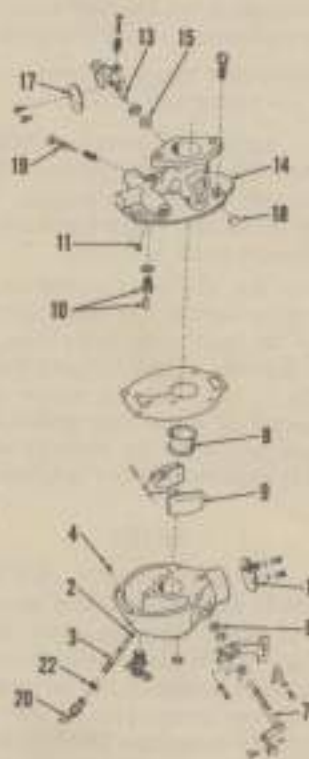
Exploded view of Marvel-Schebler carburetor typical of TSX-464, TSX-561, TSX-773, TSX-869 and TSX-871 models. Refer to Fig. 58 for legend.
